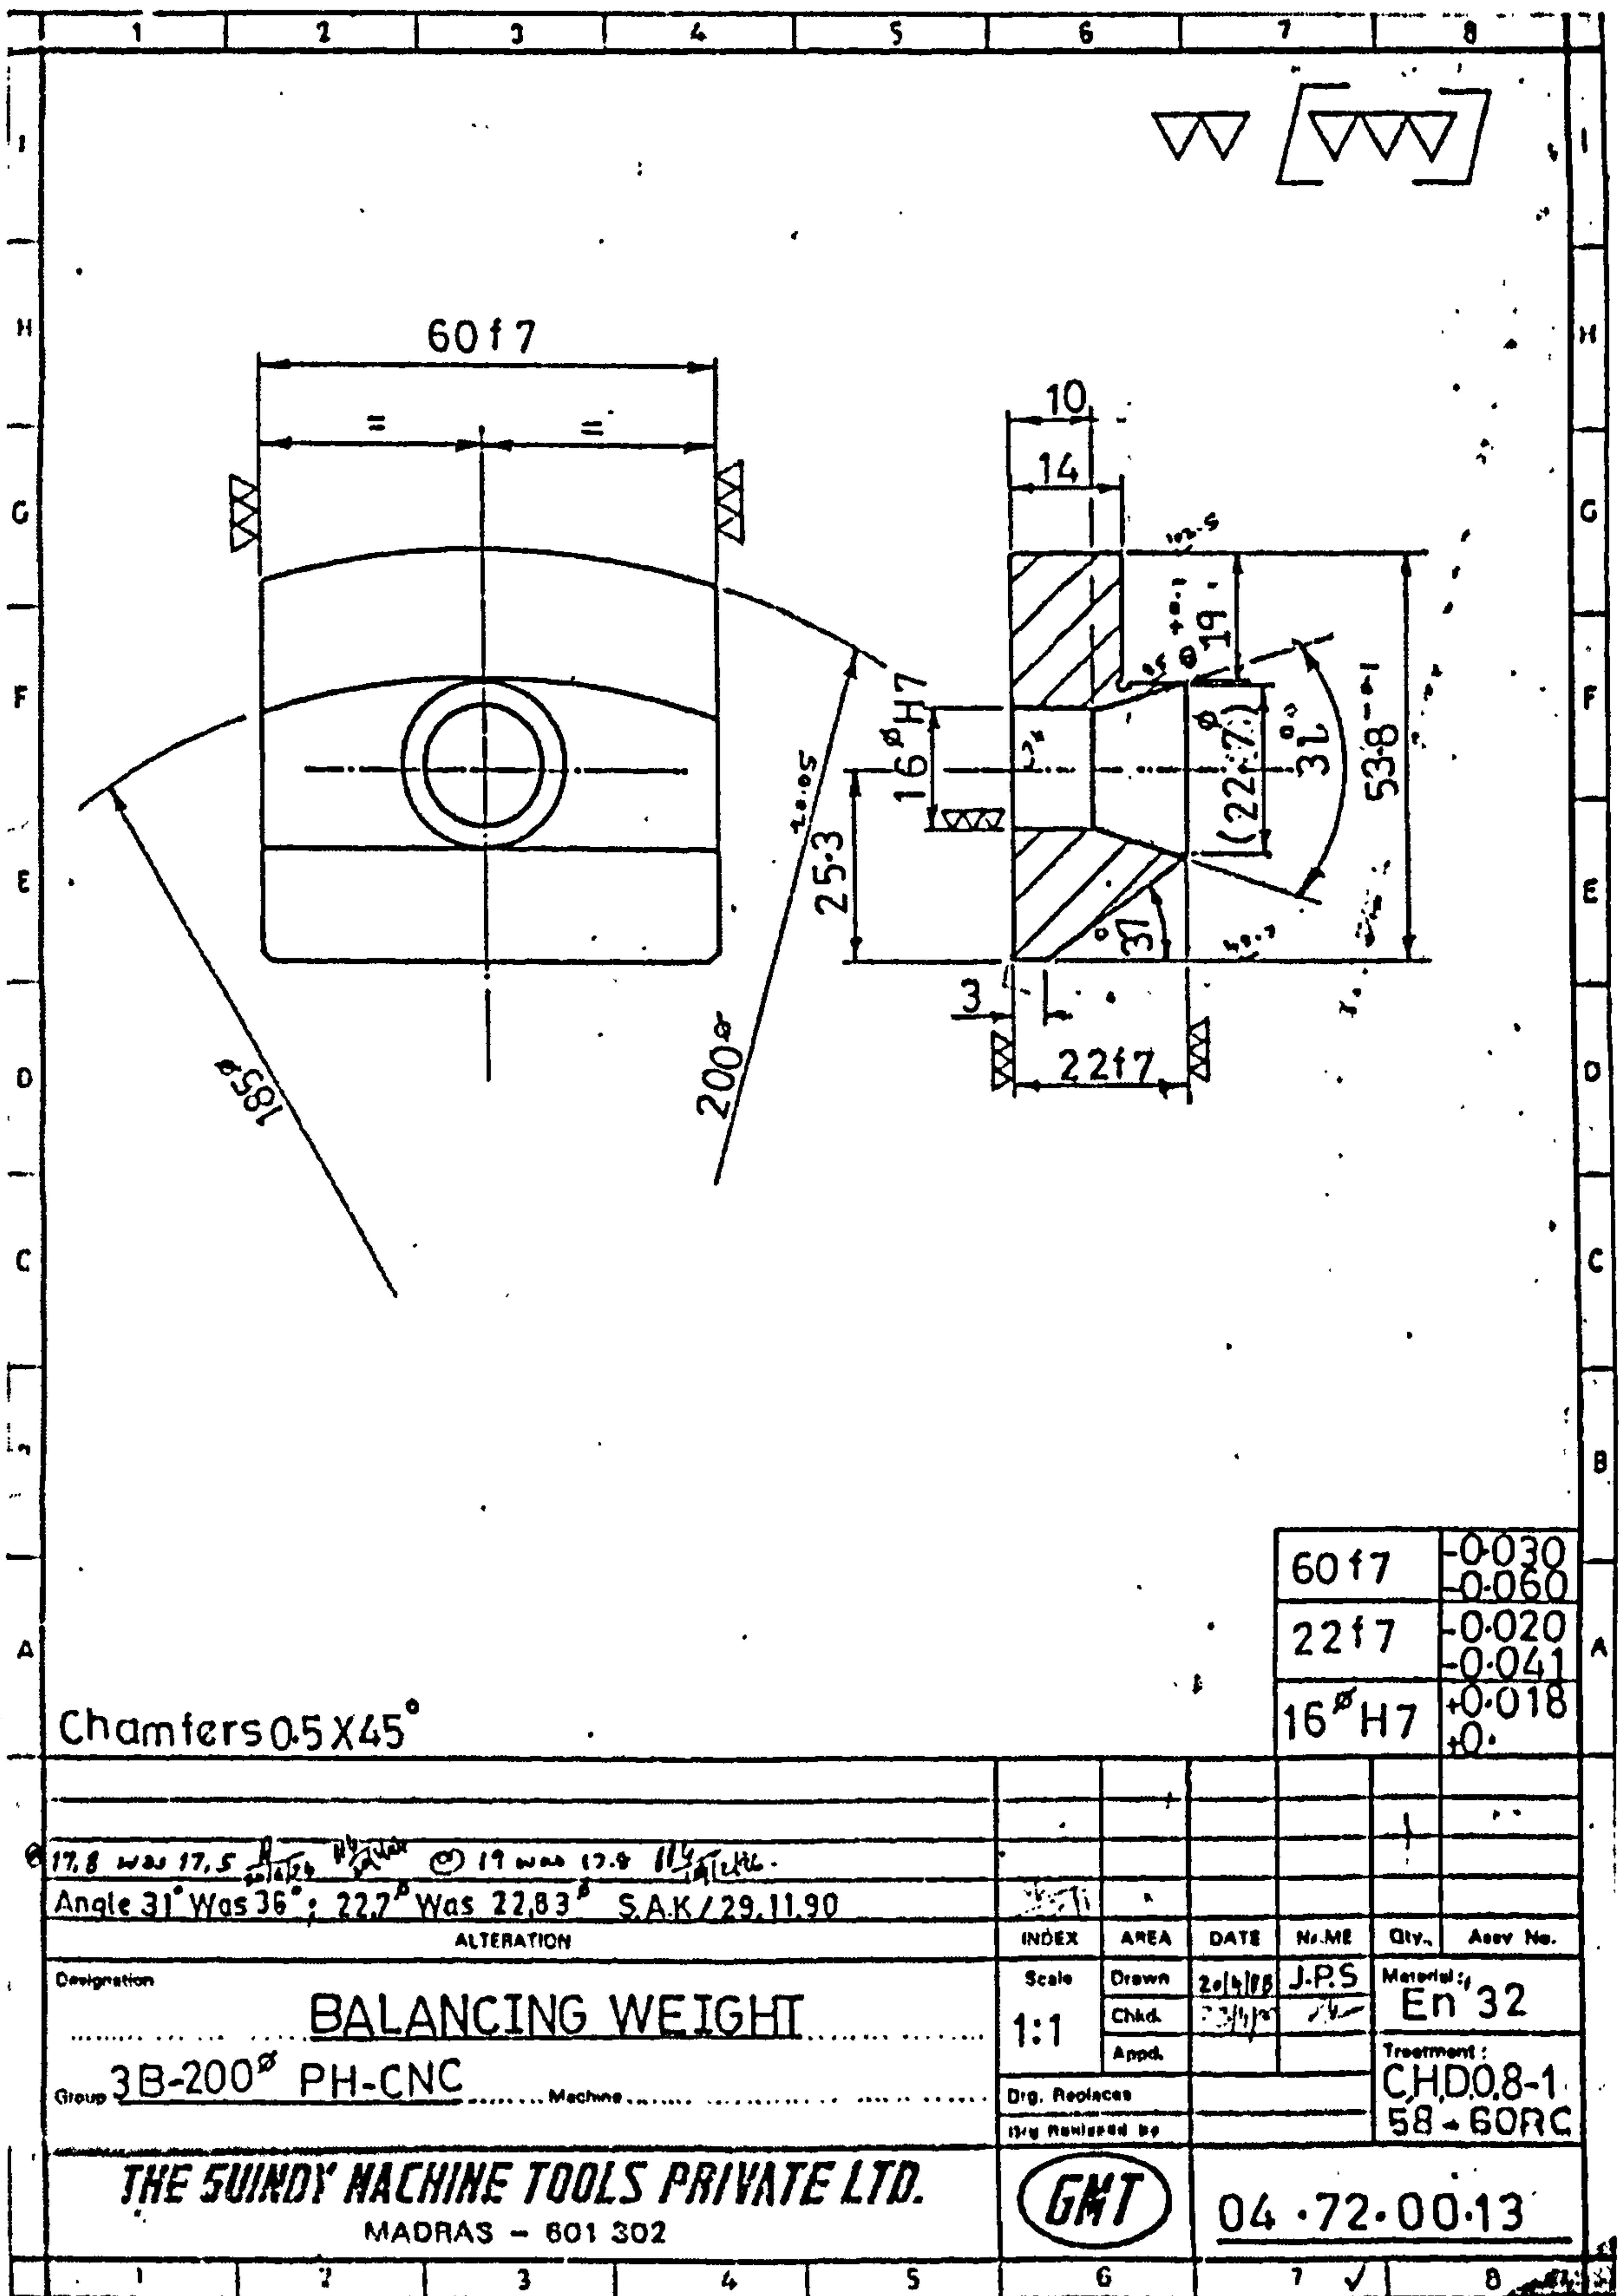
GMT Chuck Balancing Weight – Example Manufacturing Drawing
